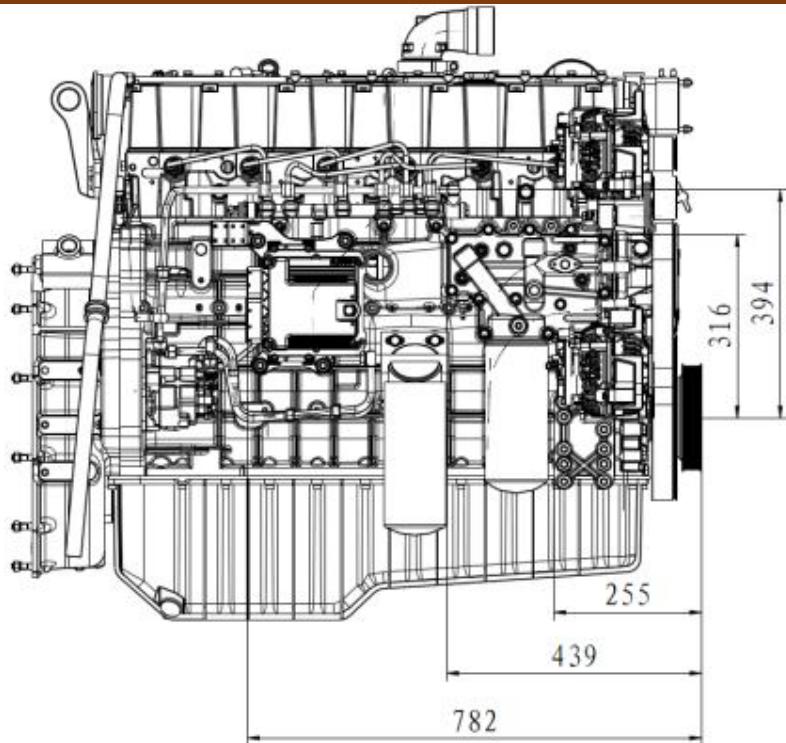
Side view of WP5 Euro IV-standard electronic oil pump diesel engine
